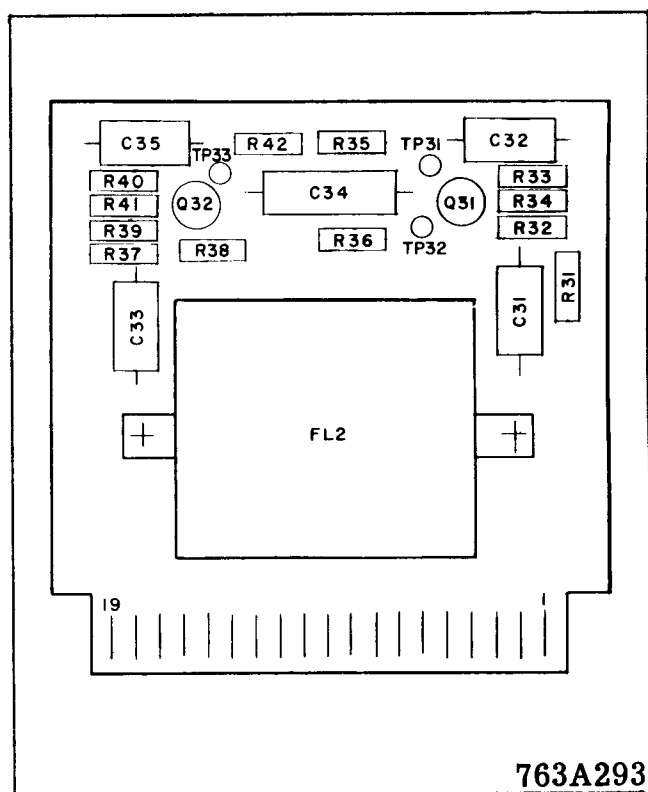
Component Locations on the I. F. Amplifier Printed Circuit Board.
